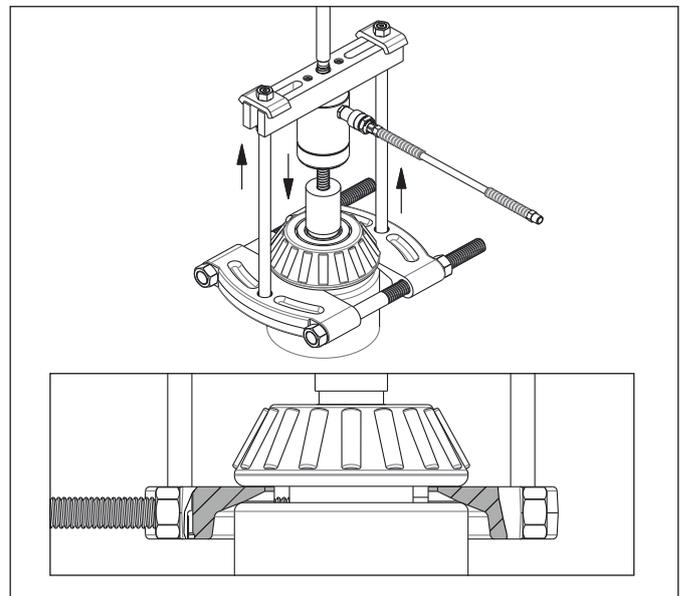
, Bearing Separator Attachment - “A” Orientation (typical)
